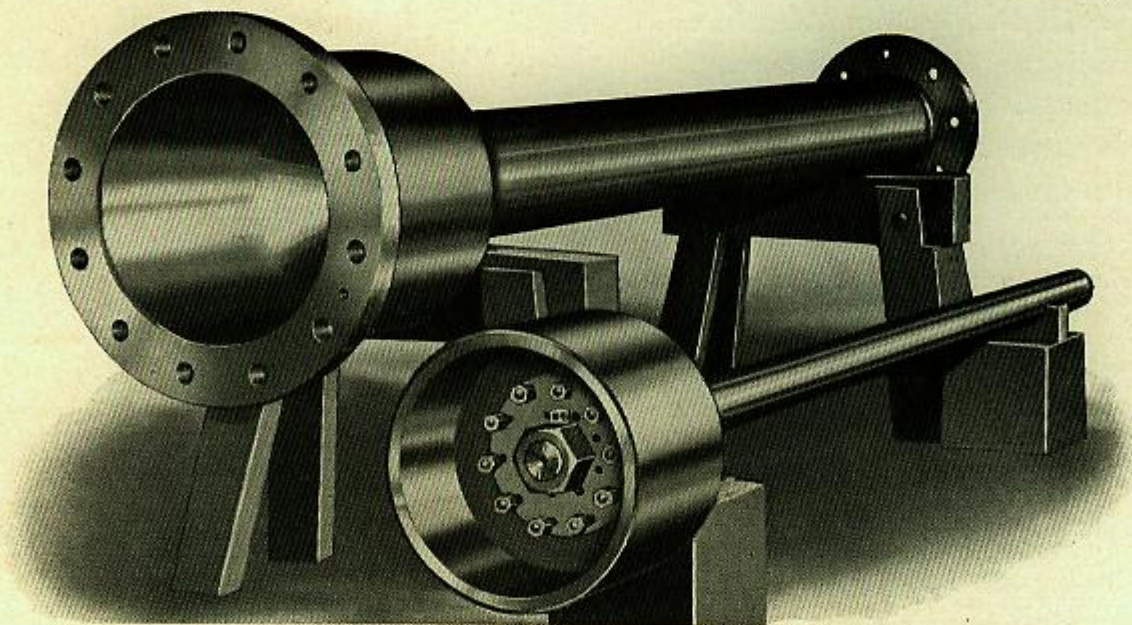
Runner servo-motor in turbine shaft and piston on regulating rod
